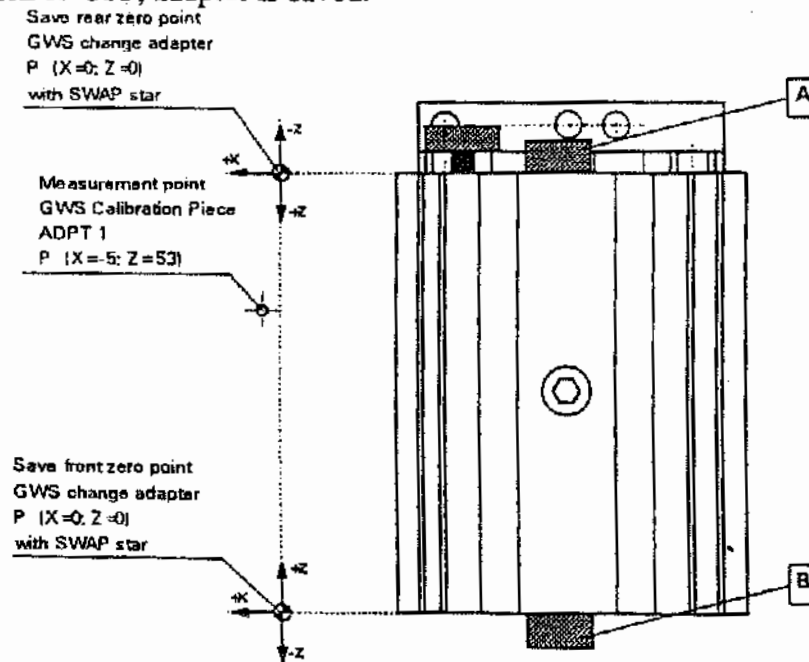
Zero points on GWS change adapter for transverse (cross slide) tools
